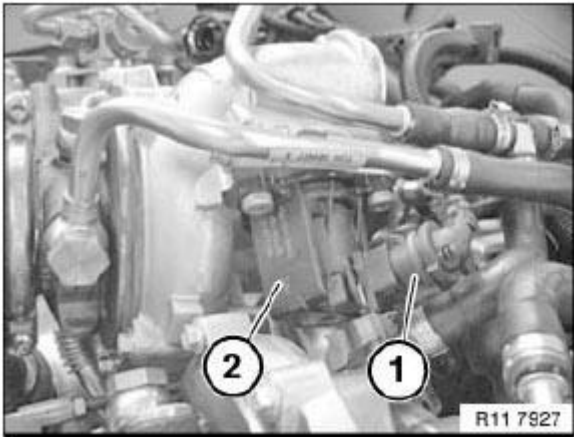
Identifying Plug Connection On Electric Changeover Valve
